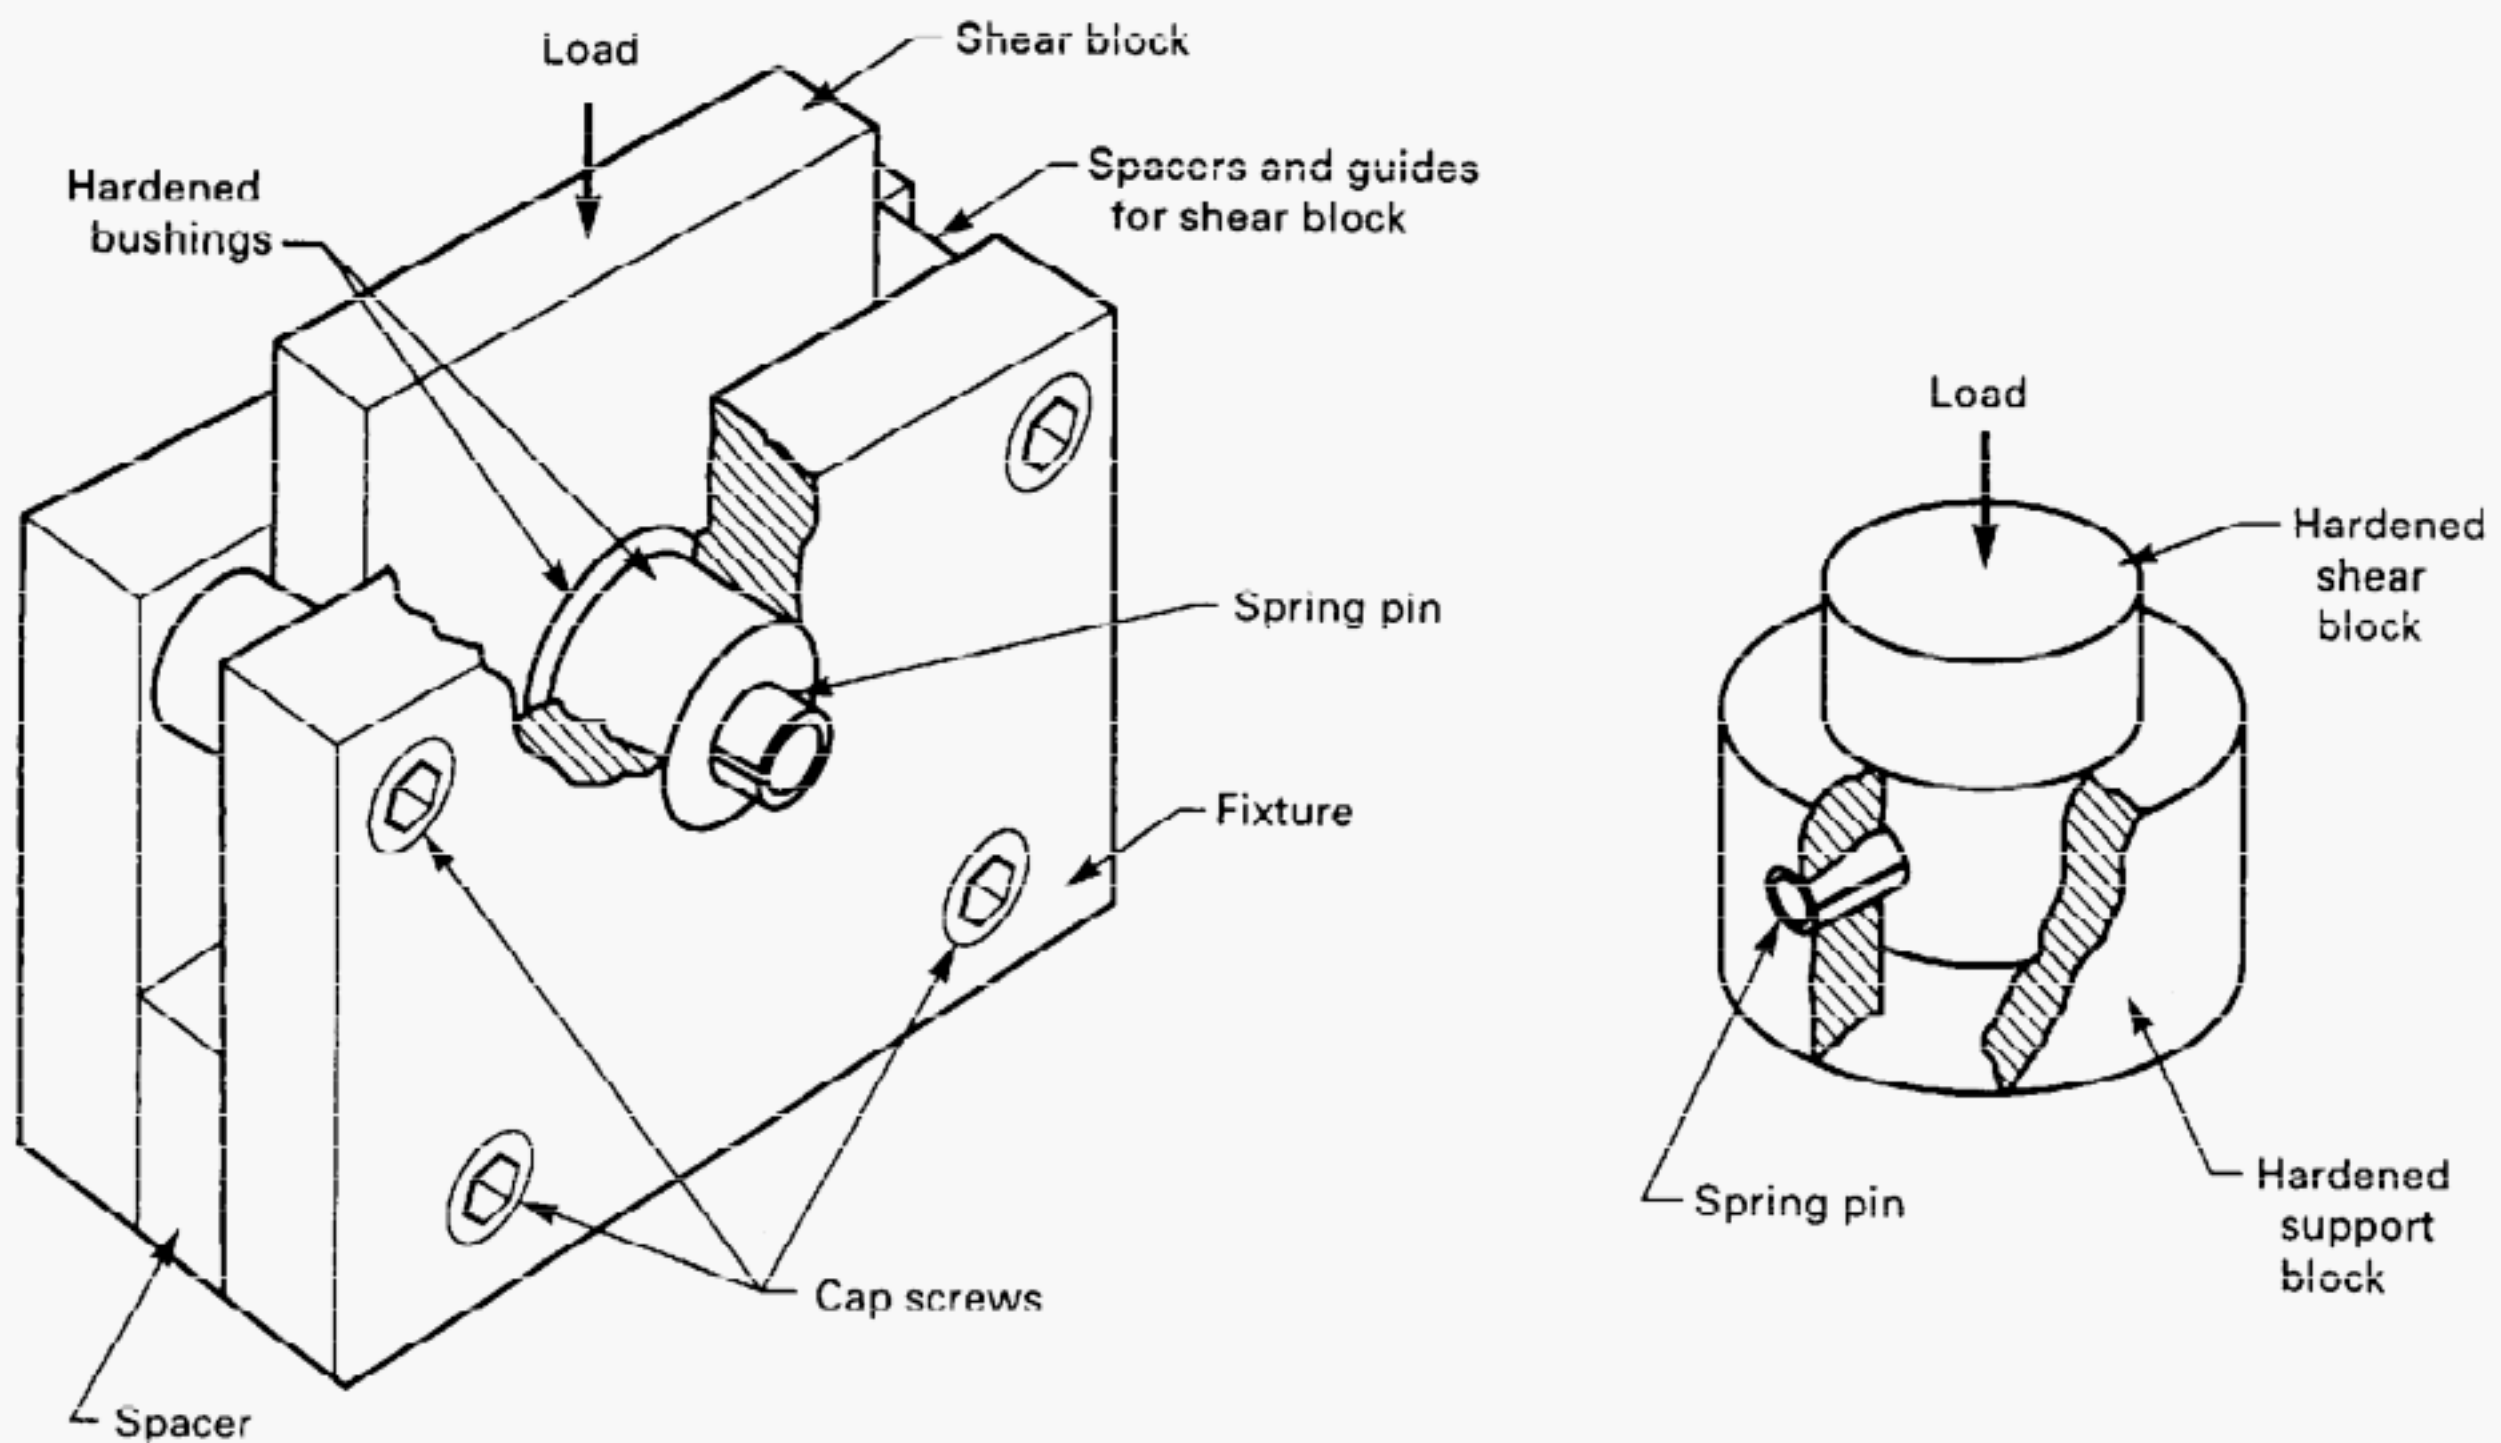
TYPICAL SPRING PIN SHEAR TEST FIXTURES
